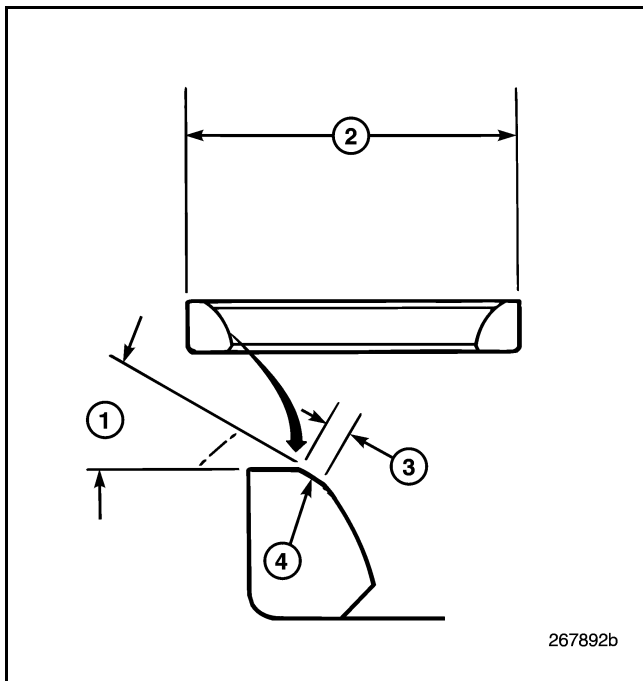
Valve Seat Insert Dimensions (Exhaust Seat Shown)
